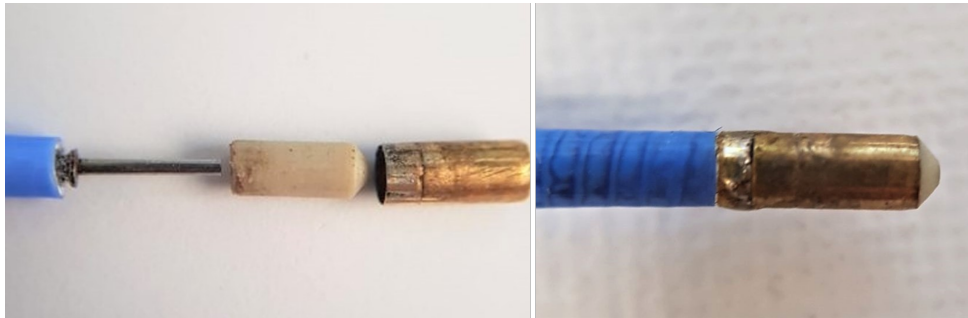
Individual (left) and assembled (right) parts for final sloped tip design
